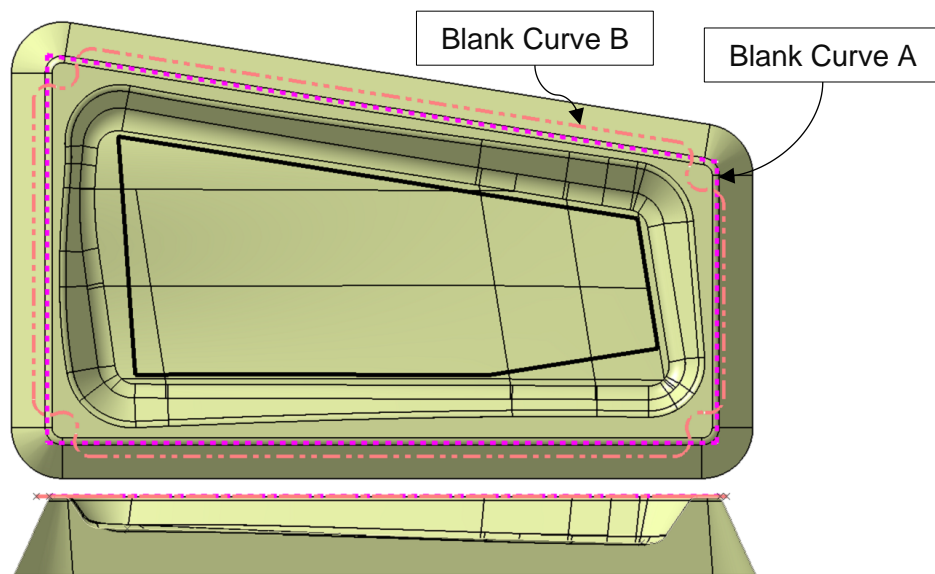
Concept-5 Tool A and Blank A & B – Top and Side Views
